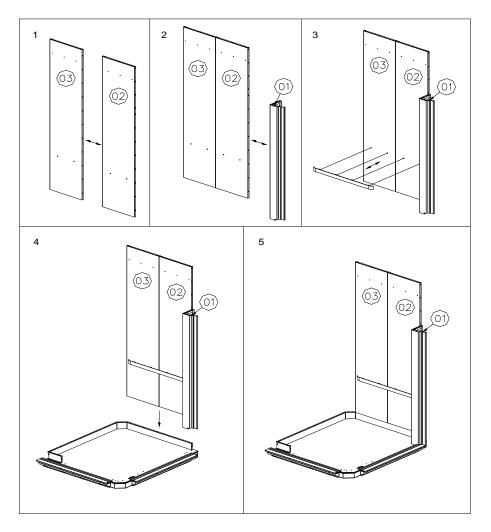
A. CAR PANEL(RIGHT SIDE) ASSEMBLY (CORNER POST)
